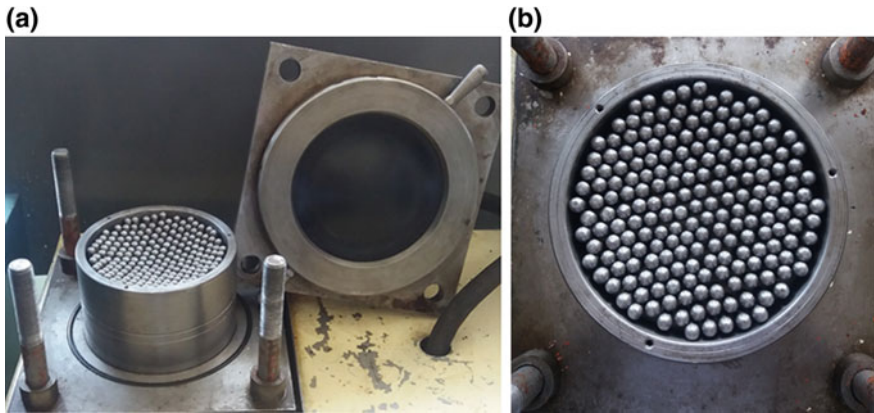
a General image of the hydro-multipoint forming tool. b Die subassembly of the hydro-multipoint forming tool
